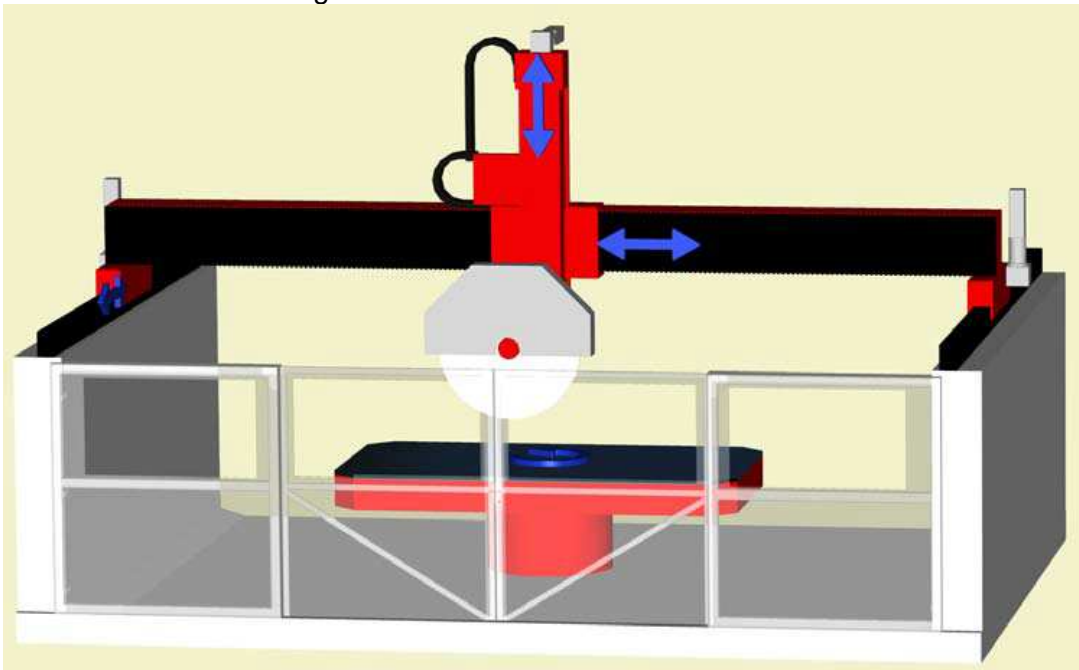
Schematic representation of a large portal cut-grinding machine used by the manufacturer.
